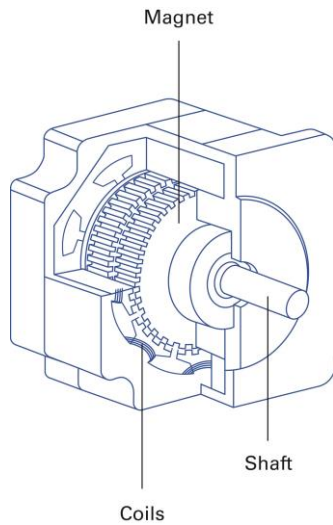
Hybrid stepper motor design with a soft iron stator and toothed permanent magnet rotor.
